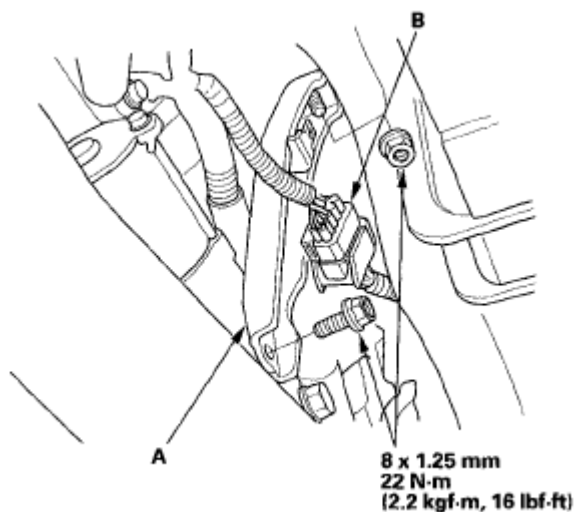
Identifying Intake Manifold Bracket (With Torque Specifications)
